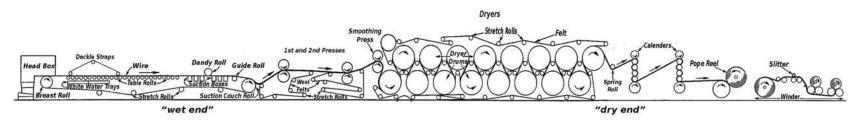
ELEVATION OF TYPICAL FOURDRINIER PAPER MACHINE AT OPERATING FLOOR LEVEL c1950
